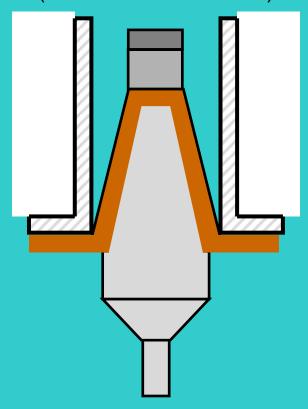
Dry-type cable connection assembly – Typical arrangement
